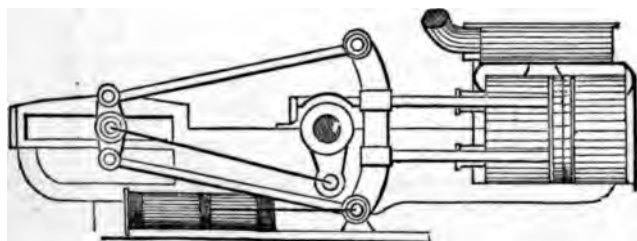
Double Piston-rod Screw-engine, Direct.
